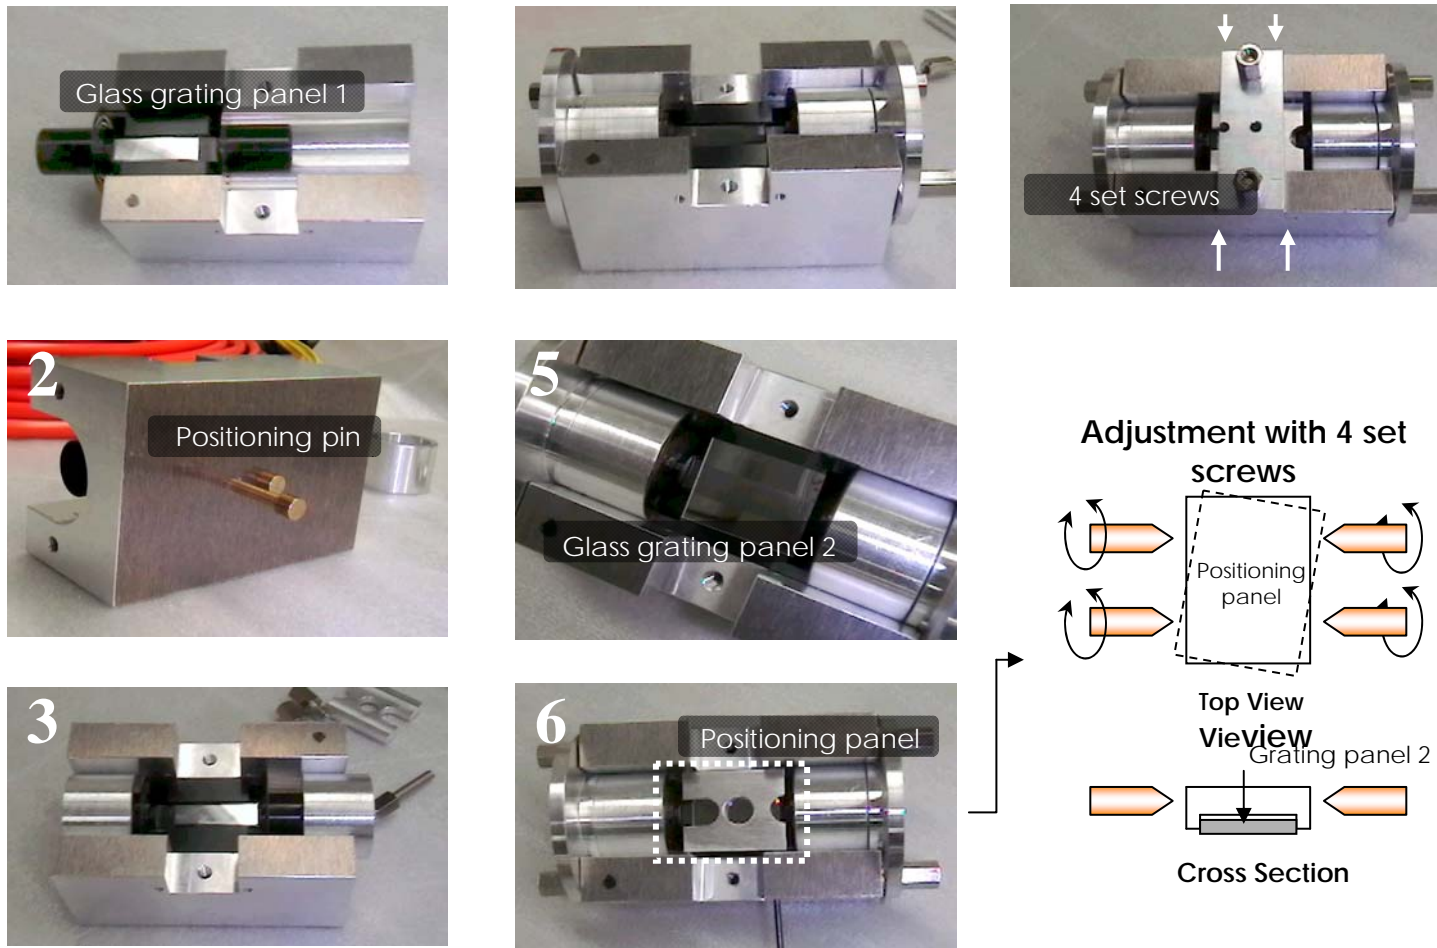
Jig and Process for High-Precision Fabrication and Packaging
